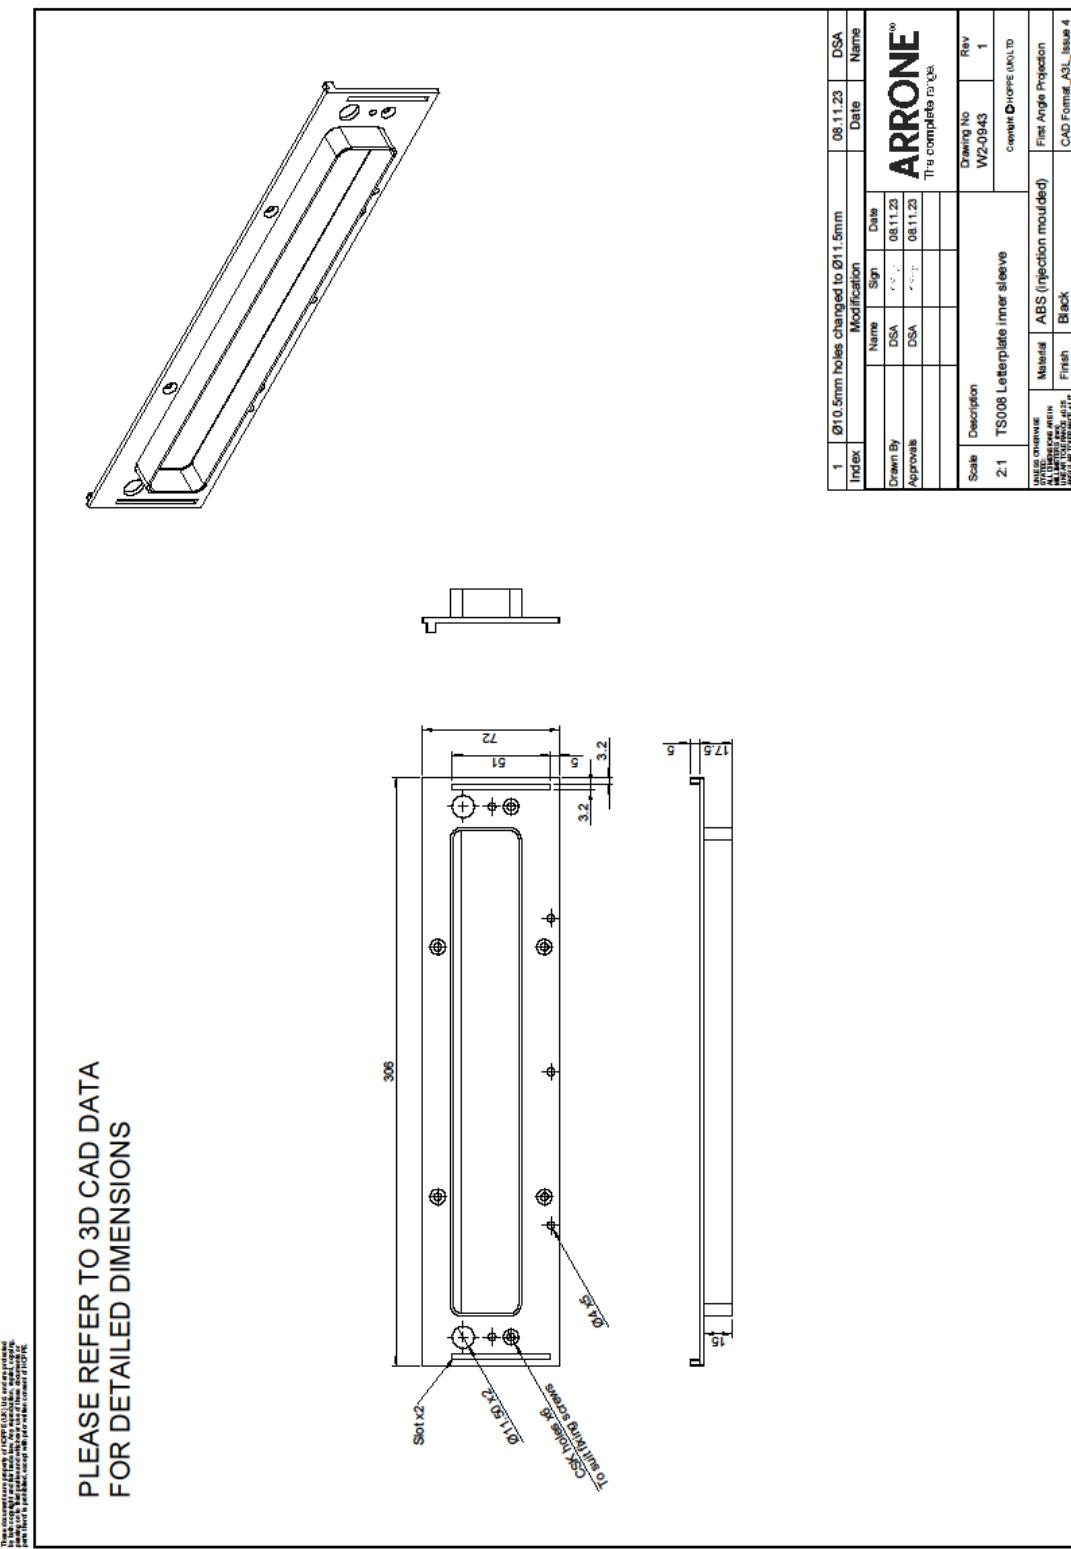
Client Inward Drawings – Letterplate Inner Sleeve
